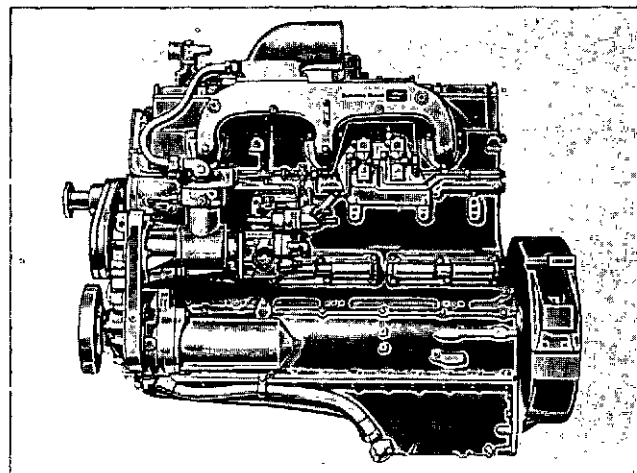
, N11952. Fuel line arrangement - NH-250 Dual Diesel
